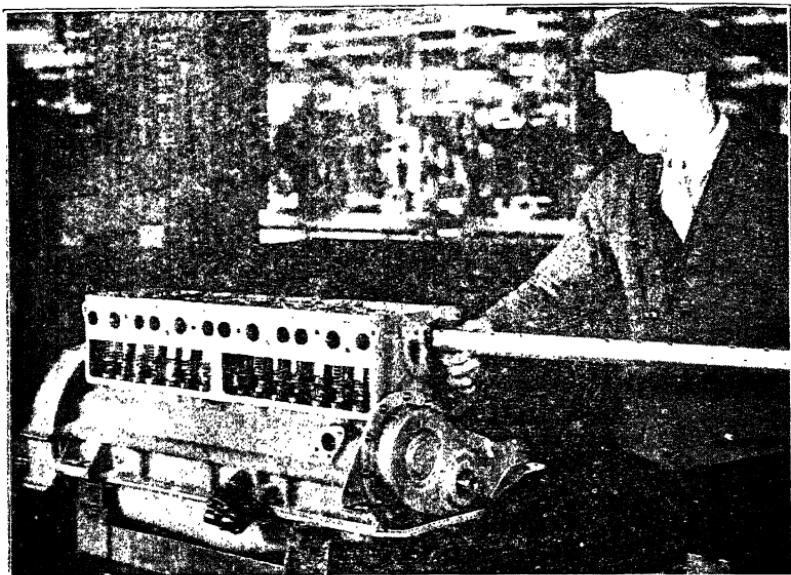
Pontiac 8-Cylinder Engine on Assembly Line
